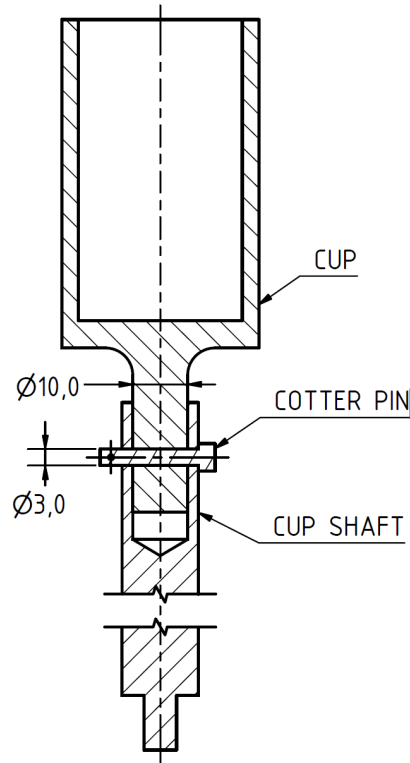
Technical drawing of the lower shear cell subassembly, with the cup, shaft, and cotter pin labeled.
